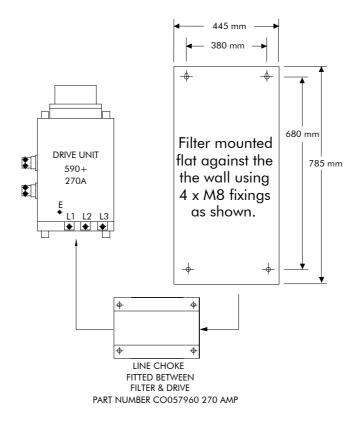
Filter Mounting Details, Part No. CO389456 for Frame 3: 270 Amp
